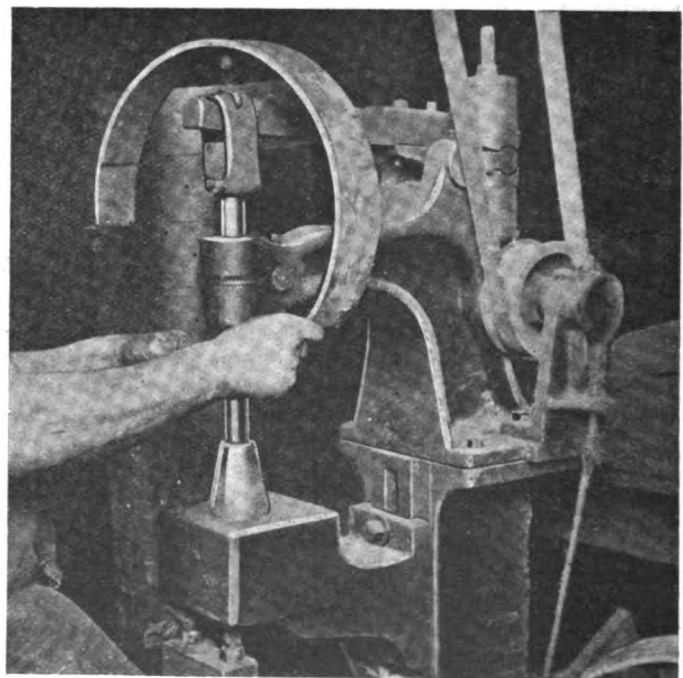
Riveting brackets that hold lever and link of an internal brake assembly
